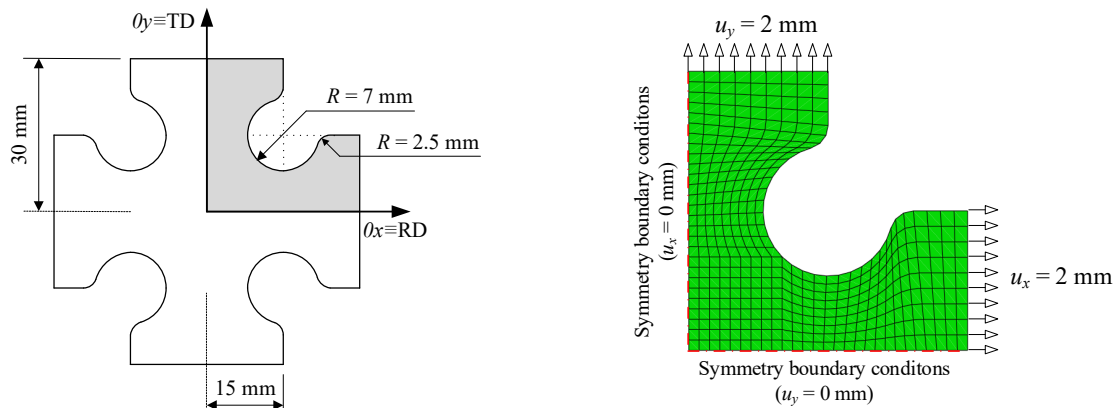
Biaxial tensile test on a cruciform sample: (a) geometry and dimensions; (b) boundary conditions and finite element mesh.
